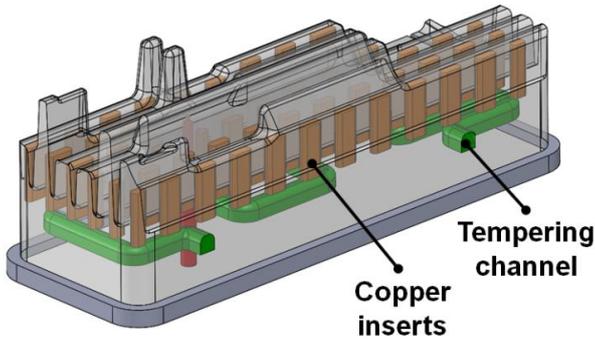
New cooling channel layout with copper inserts built with MPA.
